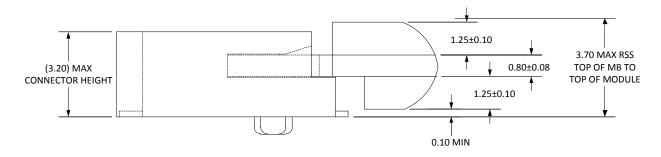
H3.2-D2 - Stack-up Top Mount Double-sided Module for 1.35 Maximum Top-side Component Height
